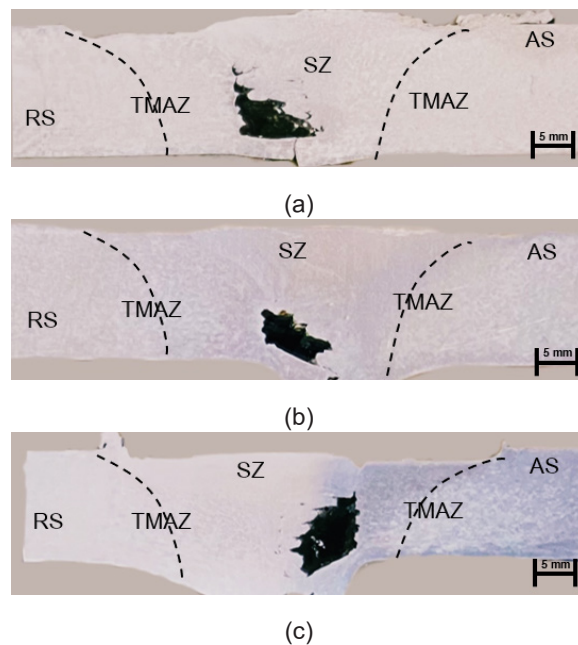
Macrostructures of weld joints at welding speed (a) 1.5 mm/min (b) 2.5 mm/min and (c) 3.5 mm/min
